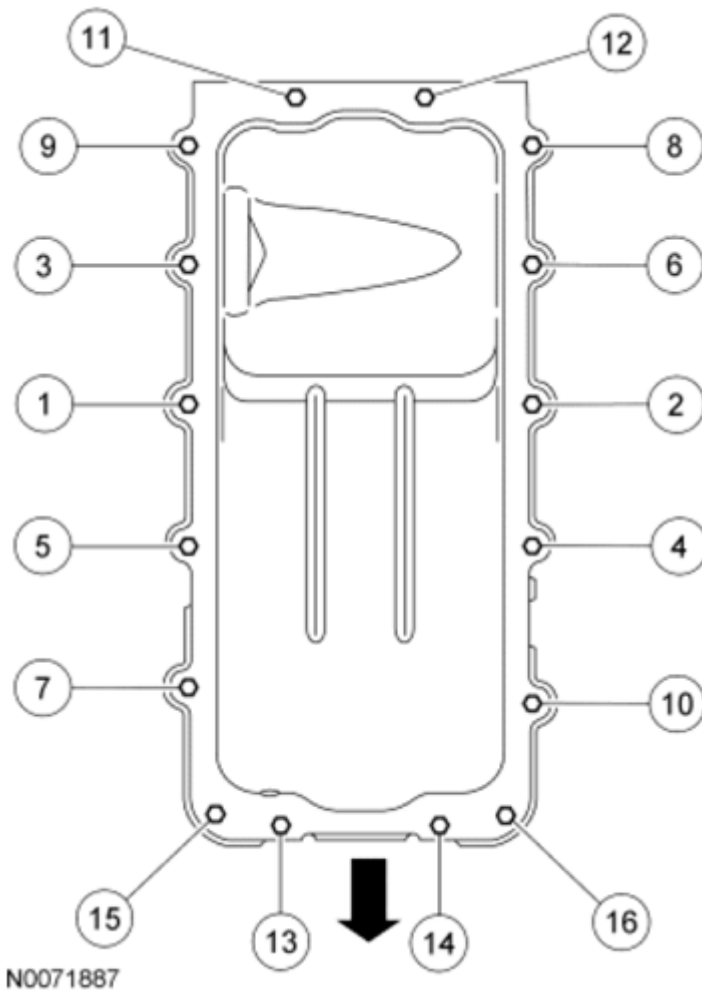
Identifying Oil Pan Bolts Removal/Installing Sequence
